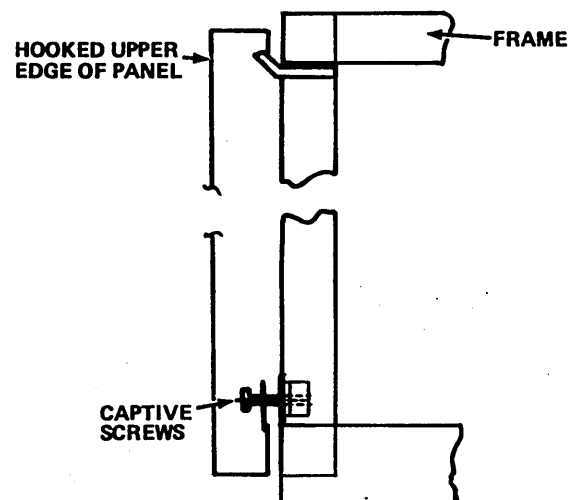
BU281 Mass-Storage Cabinet Rear Panel Attaching Detail
